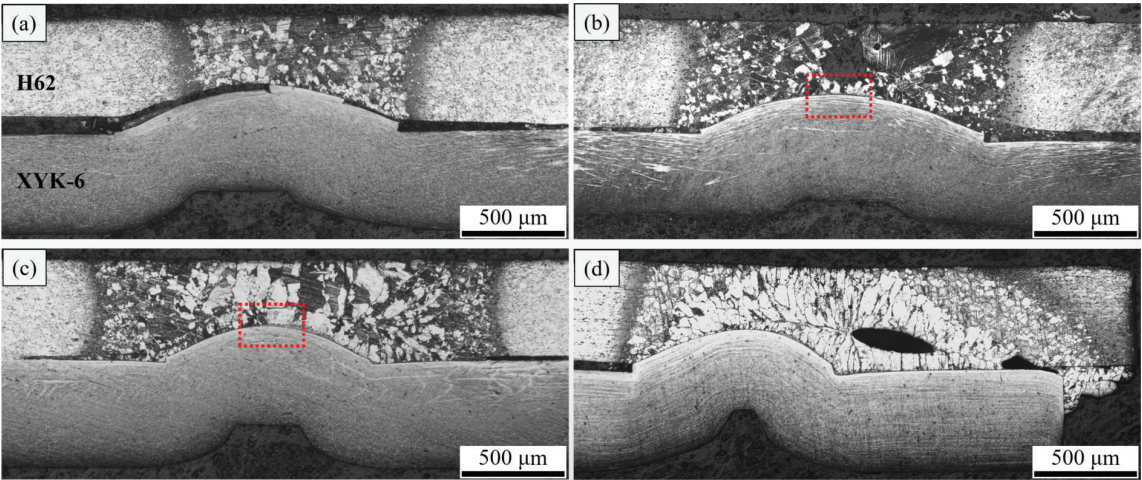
Traverse macro cross-section of an XYK-6/H62 projection weld: (a) 3.5 kA joint; (b) 4.5 kA joint; (c) 5.5 kA joint; (d) 6.5 kA joint.
